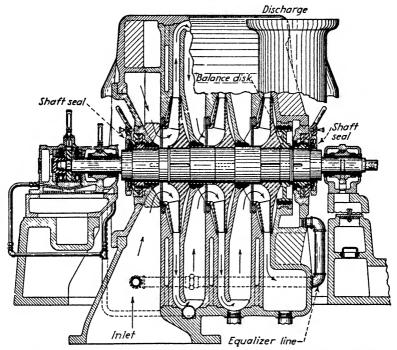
Hand-operated shaft seal and equalizing line leading to balancing disk. (Courtesy of Roots-Connersville Blower Corp.)
